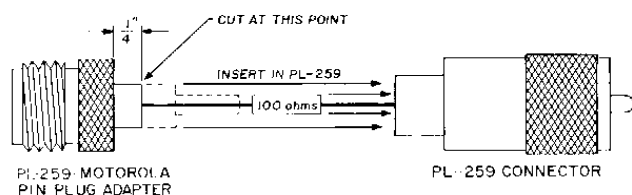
Construction details for the 100-ohm range extender unit. A PL-259 to Motorola pin plug adapter is first prepared by cutting off all but ¼" (6.5mm) of the pin and shank. A ½ watt, 100-ohm resistor is then inserted in the pin of this adapter and soldered. The shortened shank and resistor are then inserted in the back of the PL-259 plug. The other resistor wire is soldered to the center pin of the PL-259 connector. Soldering the exterior surfaces together completes the assembly.
